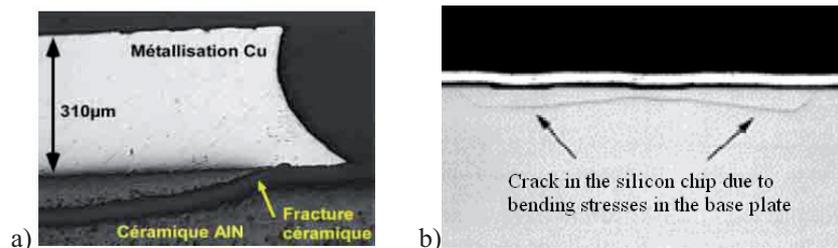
Fracture of ceramic substrates (a) [4] and silicon chip (b) [3].
